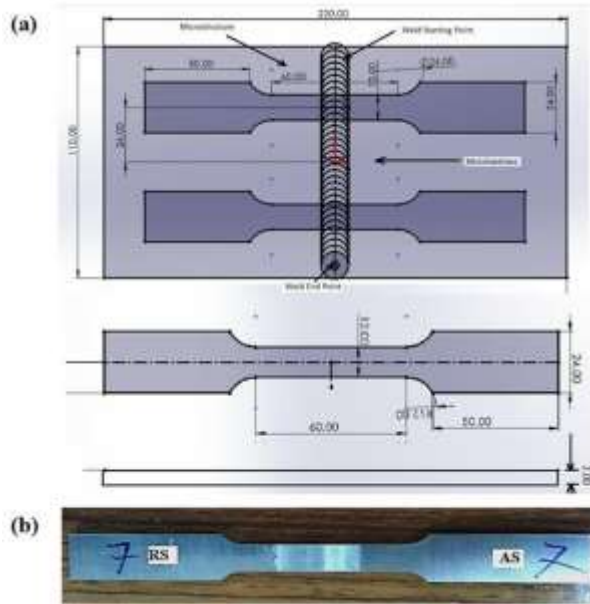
(a) Tensile test specimen with dimensions, (b) Actual Tensile test specimen
